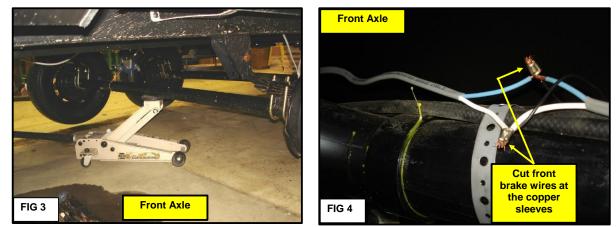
Place a floor jack under the front axle for support while the hardware is removed.
